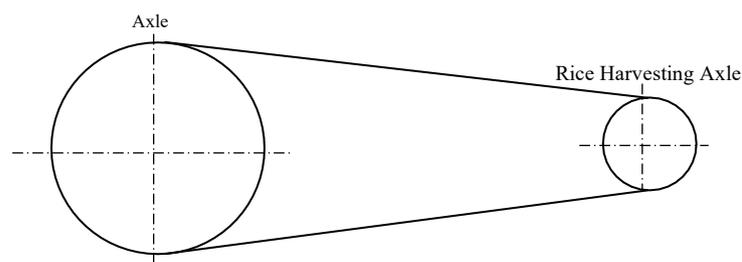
Wheel Shaft Sprocket to Rice Picker Sprocket
